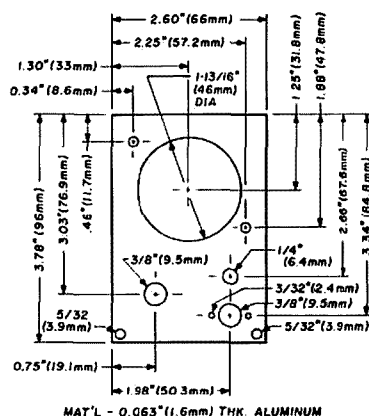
Front-panel layout viewed from the rear. The two 5/32-inch (3.9mm) holes at bottom are located 0.156 inch (3.9mm) in from each side and are for panel-to-case mounting screws.
